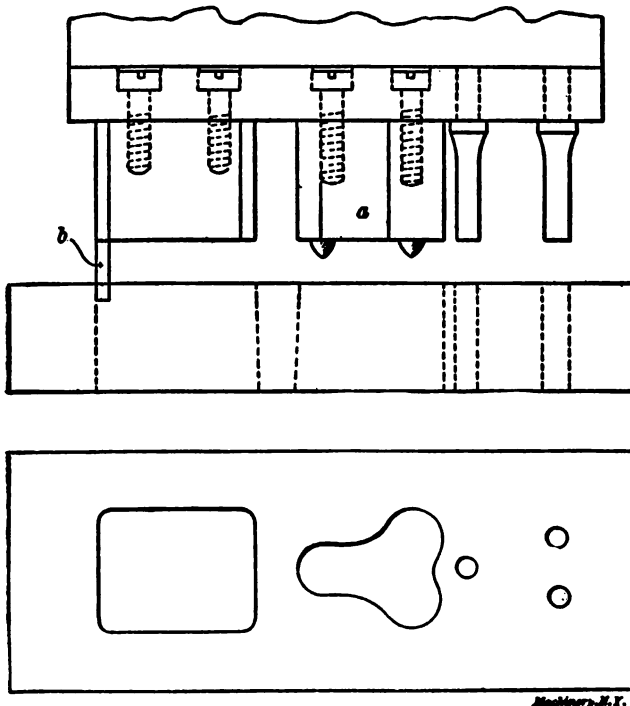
Gang Punch Arranged to Use Sheet Stock
